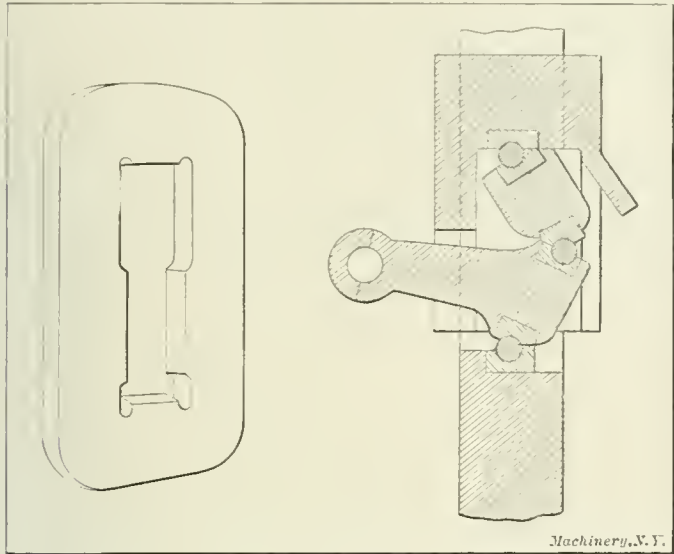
Slide and Link or Arm Mechanism used on the Presses shown in Figs. 10 to 12 inclusive
